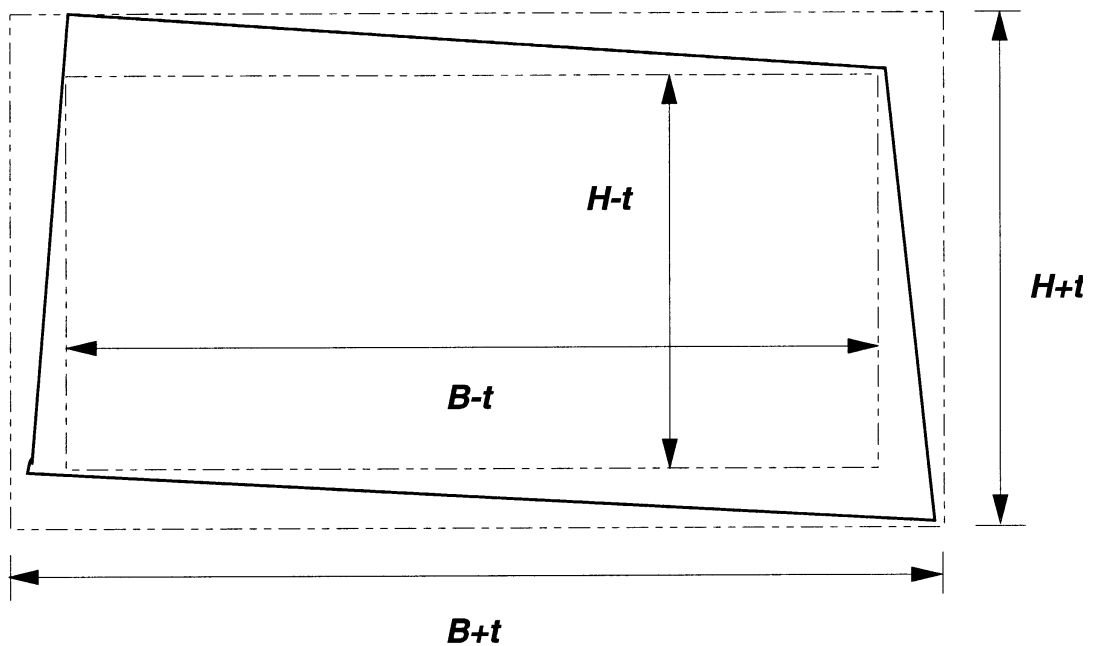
Tolerance limits for dimensions of rectangular panes
